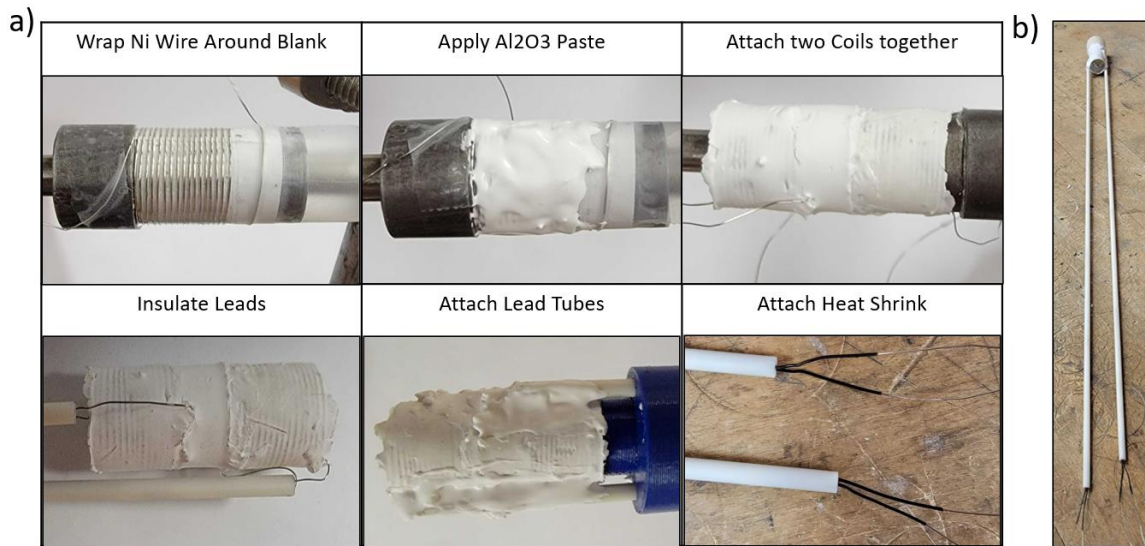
Assembly of (a) solenoid coils from start to finish, excluding the curing steps and attachment of the bottom spacer and (b) the finished assembly.
